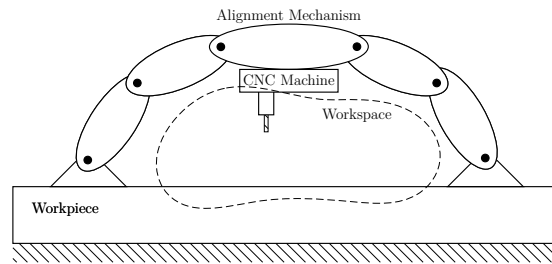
InnoMill CNC machine on parallel manipulator alignment mechanism.
